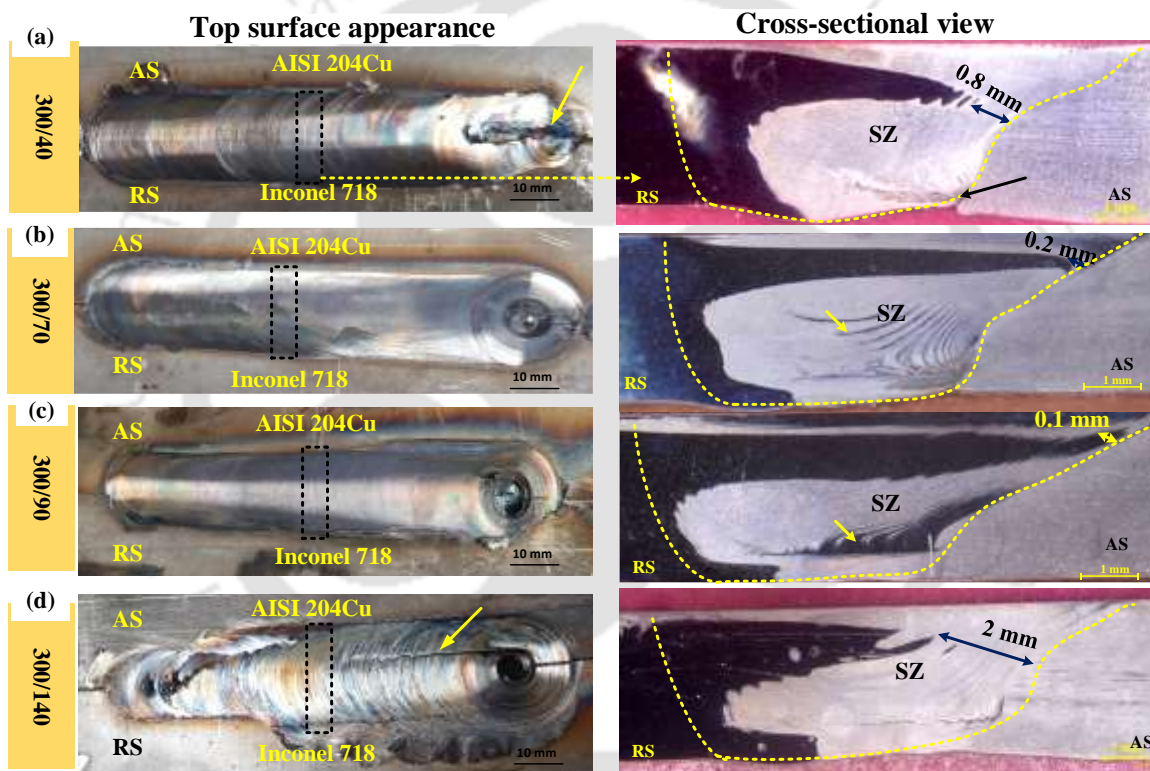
Welded top surface view with a corresponding cross-sectional view at a varying traverse speed.
